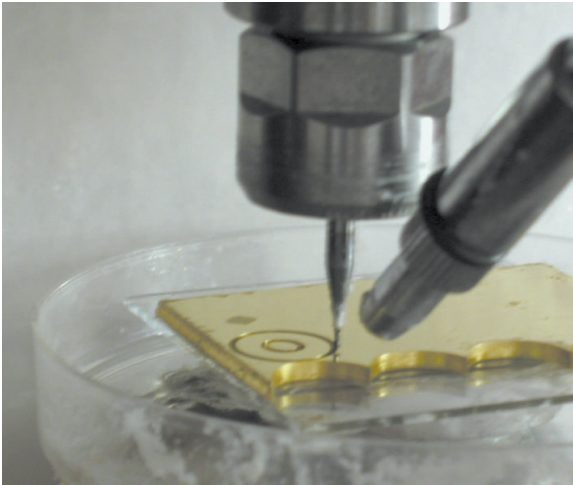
Photograph showing the machining of a gold flyer plate in the KERN micromill.
